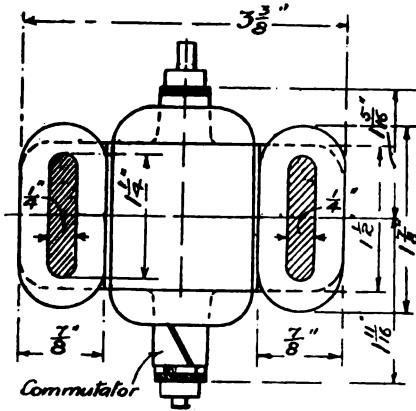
PLAN OF MANCHESTER TYPE MOTOR FOR 2-IN. GAUGE MODEL TANK LOCOMOTIVE.
